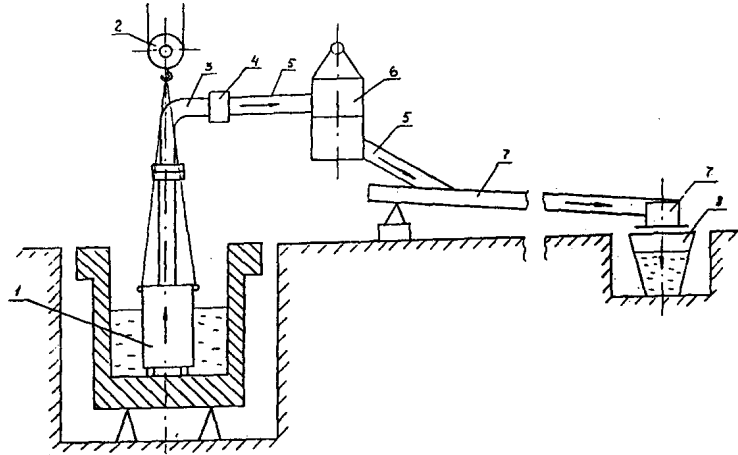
Scheme of immersible MHD pump system for transfer the alloy aluminum-zinc in coating workshop, plant "everstal". 1 - MHD pump; 2 - suspension bracket unit; 3 - knee; 4 - flange connection; 5 - chutes; 6 - storage; 7 - trays; 8 - moulds.
